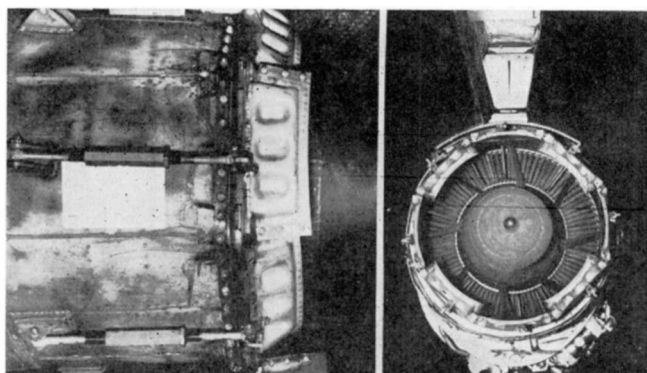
Adjustable-type suppressing nozzle (flaps shown in suppressing position)
